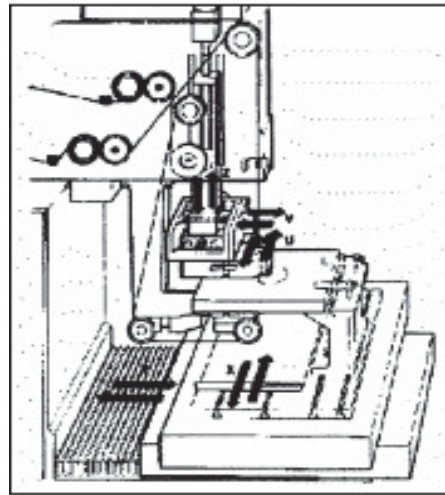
Part-positioning tables, wire delivery and take up system, and three axis taper mechanisms for WEDM.
